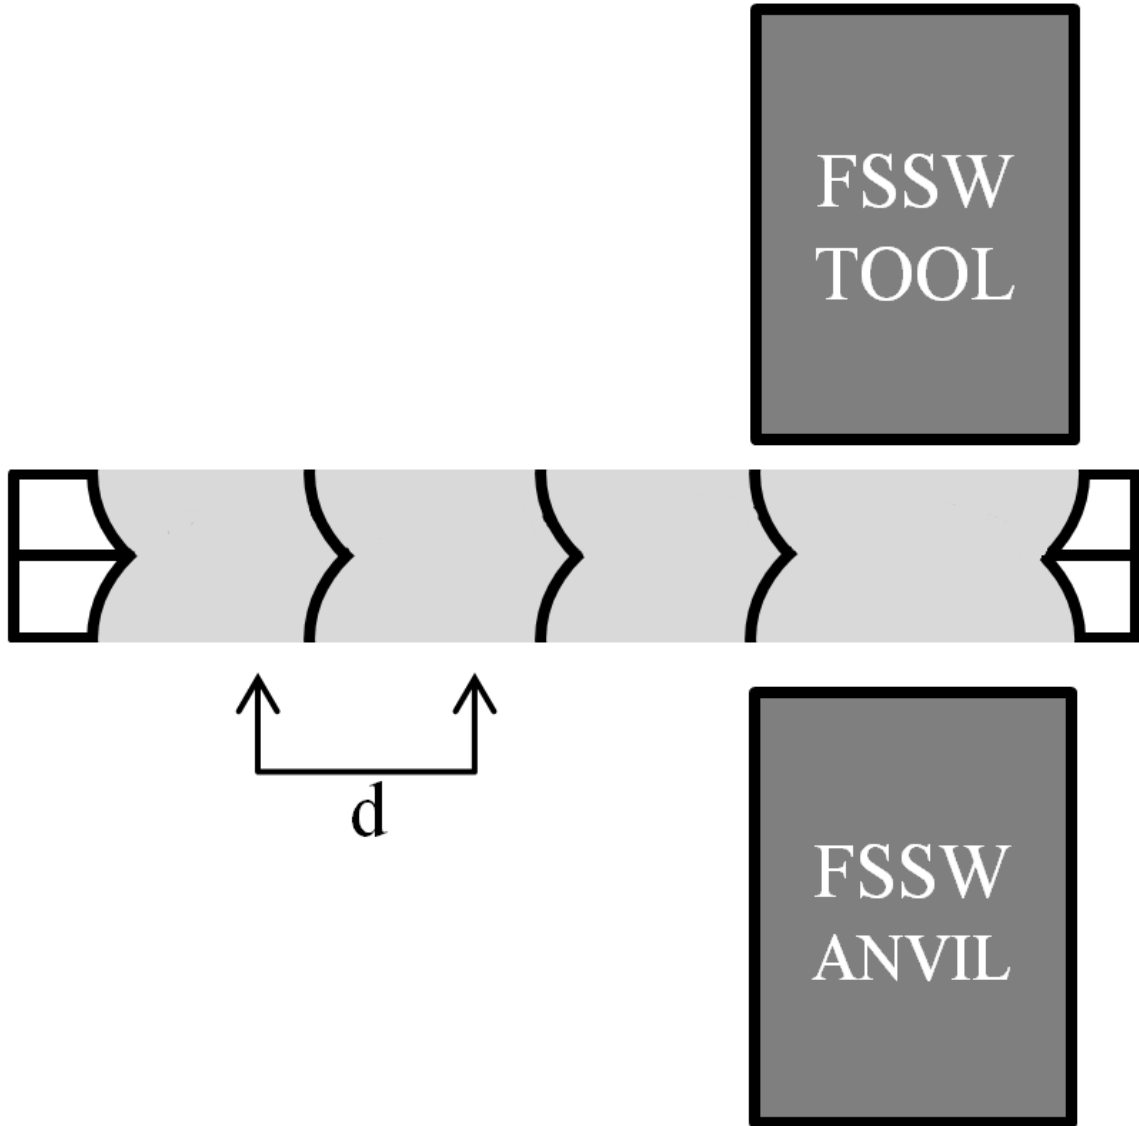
The Friction Stir Spot Stitch welding process.  $d$  is the spacing between each FSSW spot weld.
